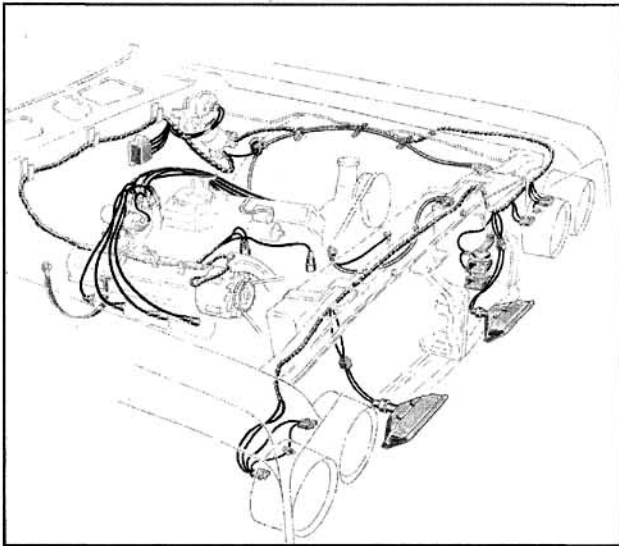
Chasis Wiring Harness (52 through 86 Series)
